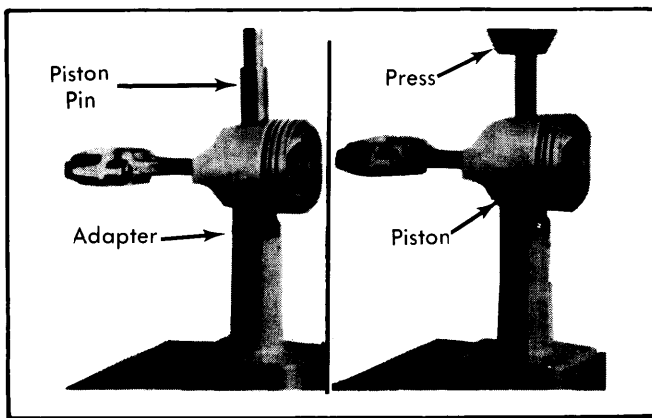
Piston Pin Removal and Installation with Press and Adapter
